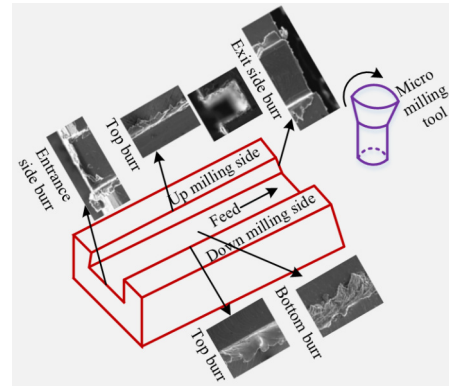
Types of burrs in micro end milling.^{86,87,91}
